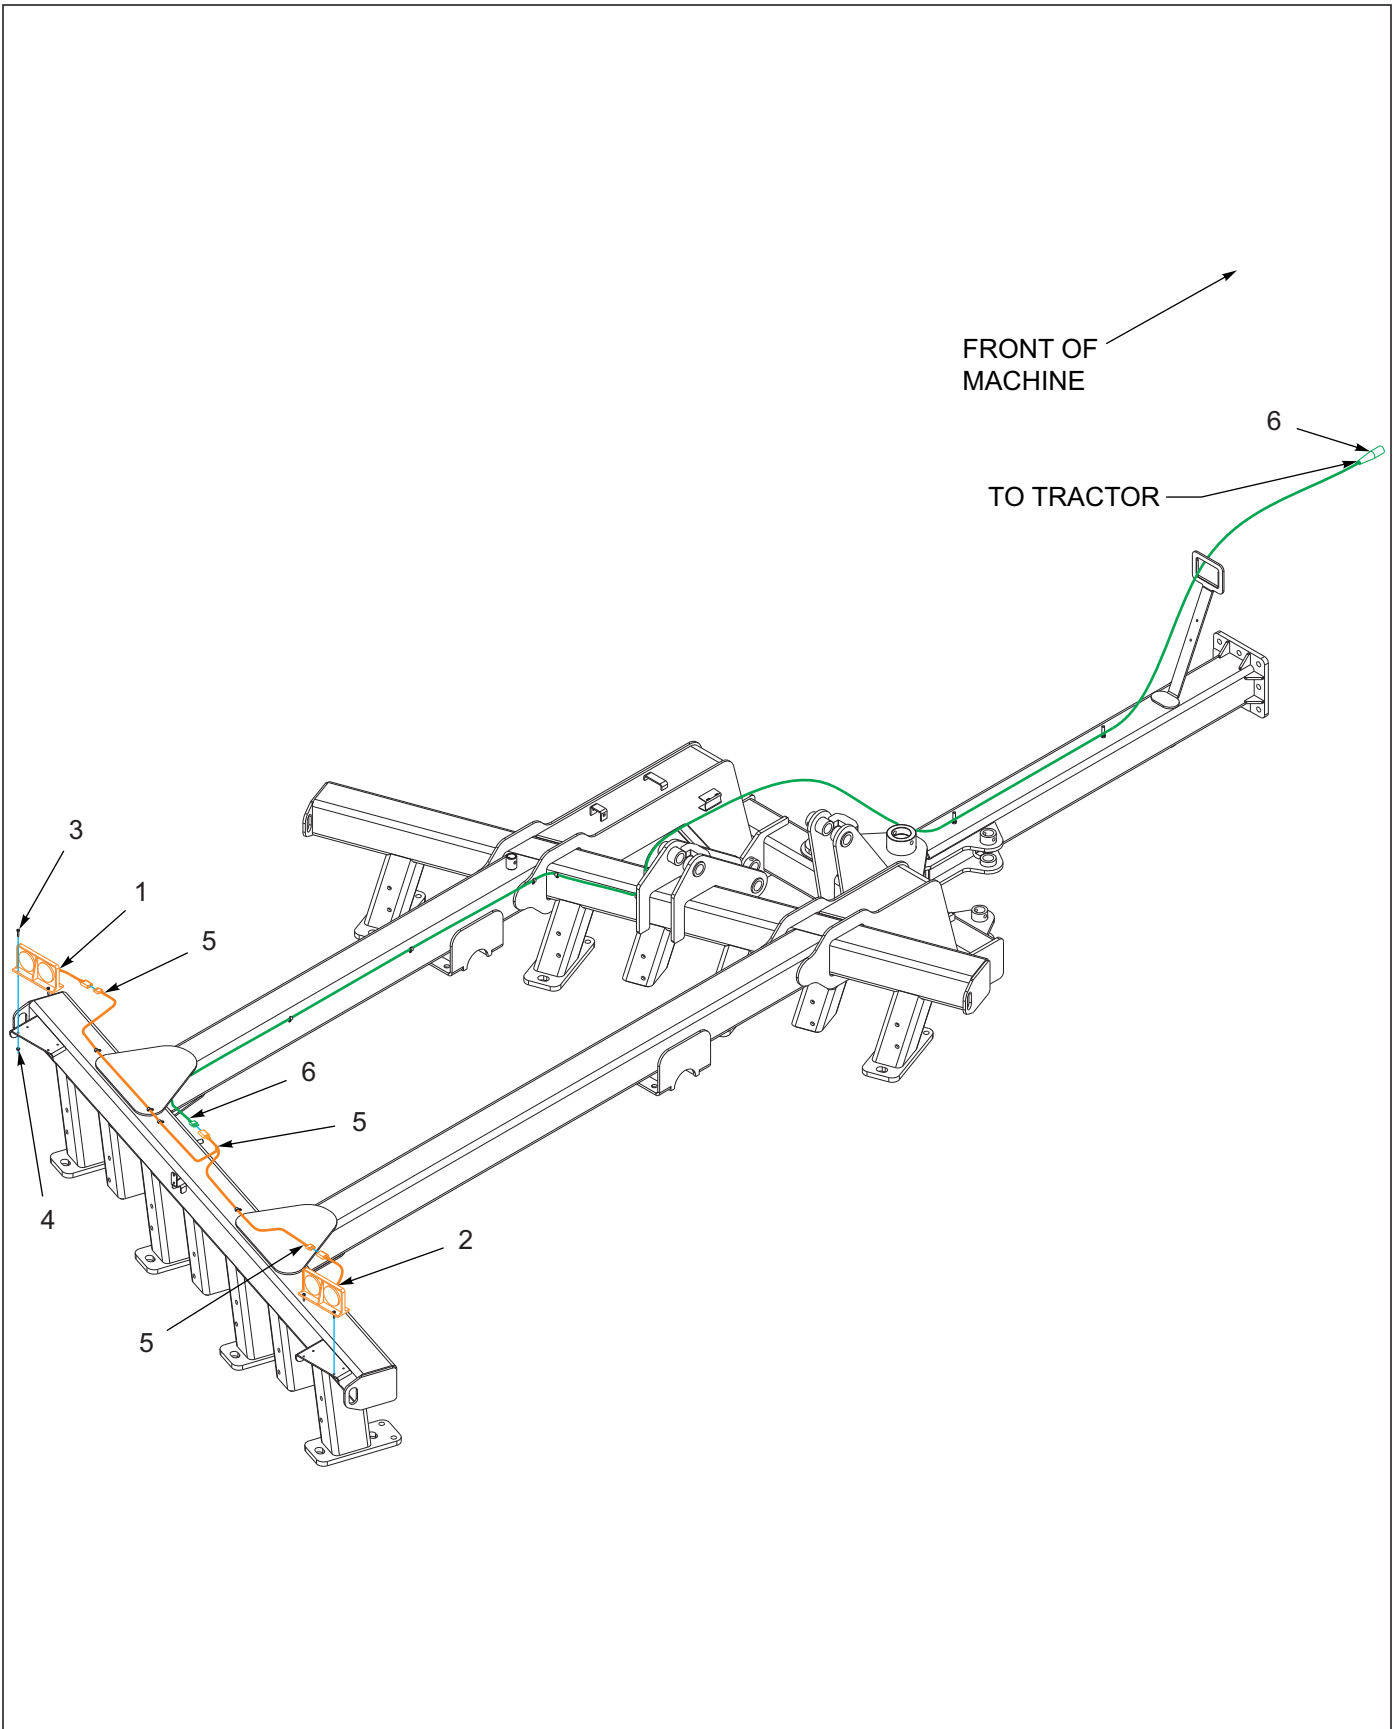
Electrical Assembly (Before 6-1-2016)
